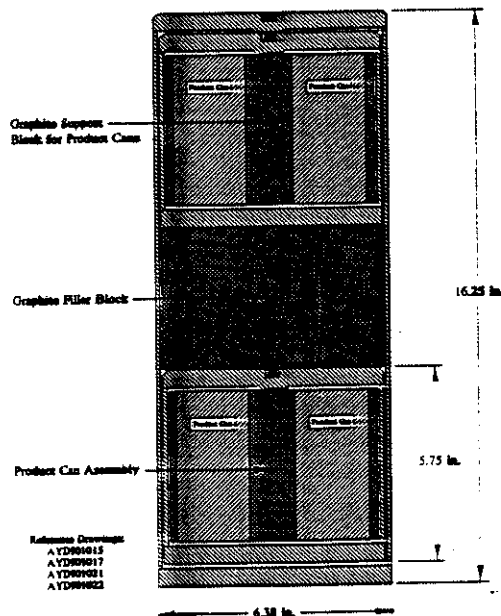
The Mound 1kW Cask Loaded with the Product Can Containment Assembly
